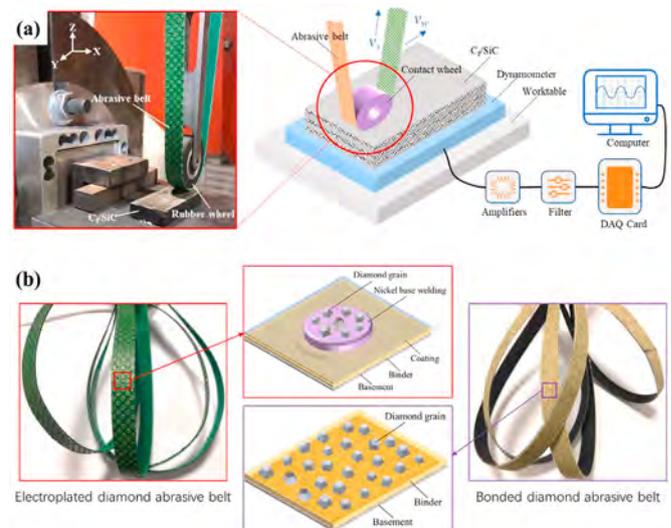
Belt grinding of C_f/SiC composites [215]: (a) CNC abrasive belt grinding machine; (b) two types of diamond abrasive belts used in the experiment.
